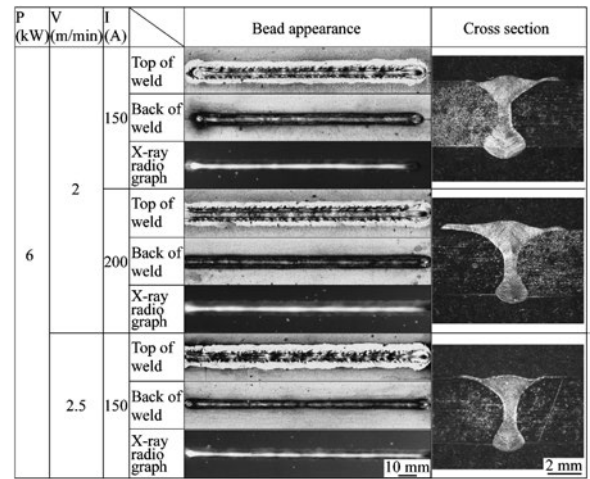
Surface appearances, X-ray radiographs and cross sections of Inconel 601 hybrid welds.
